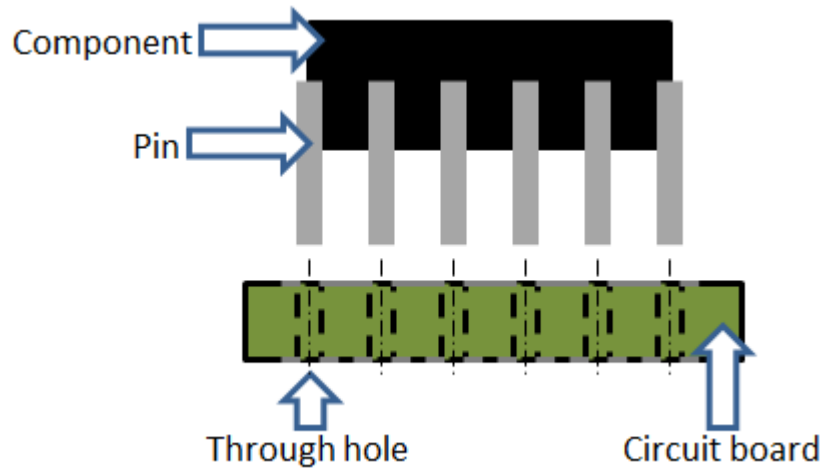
Diagram of intended through hole pin placement to circuit board placement and mating surfaces
